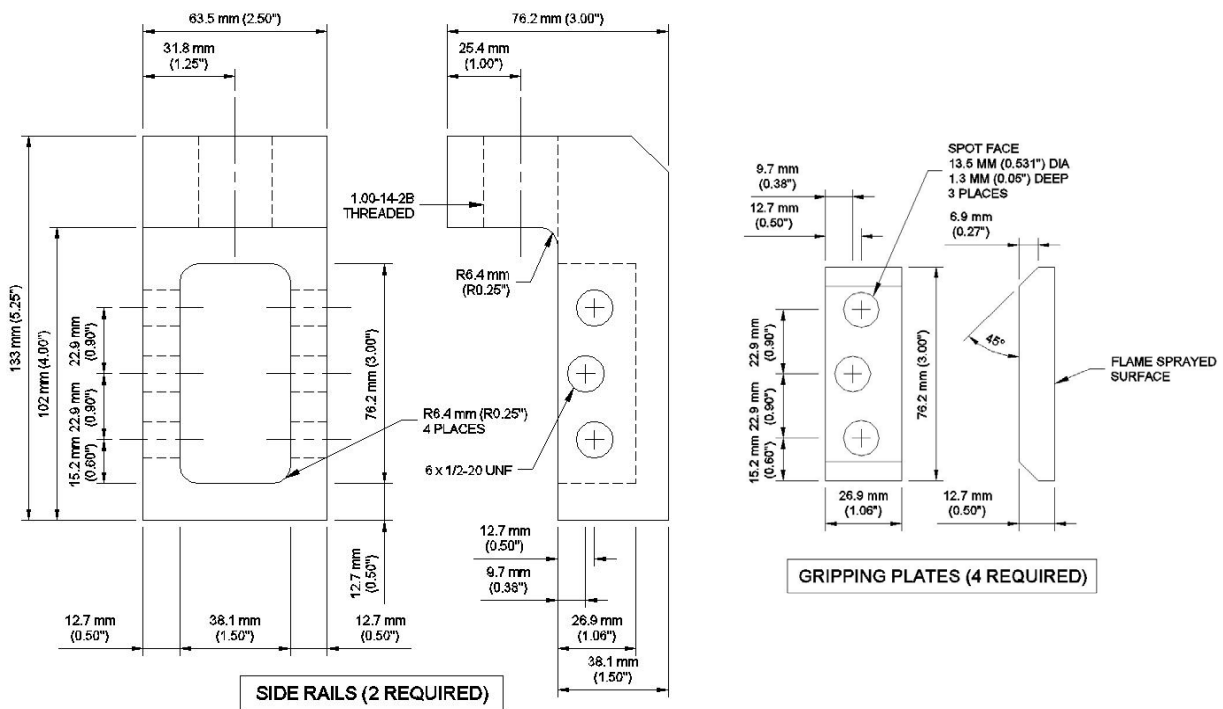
Dimensions of V-notched rail shear test fixture per ASTM D7078/D7078M [11]
